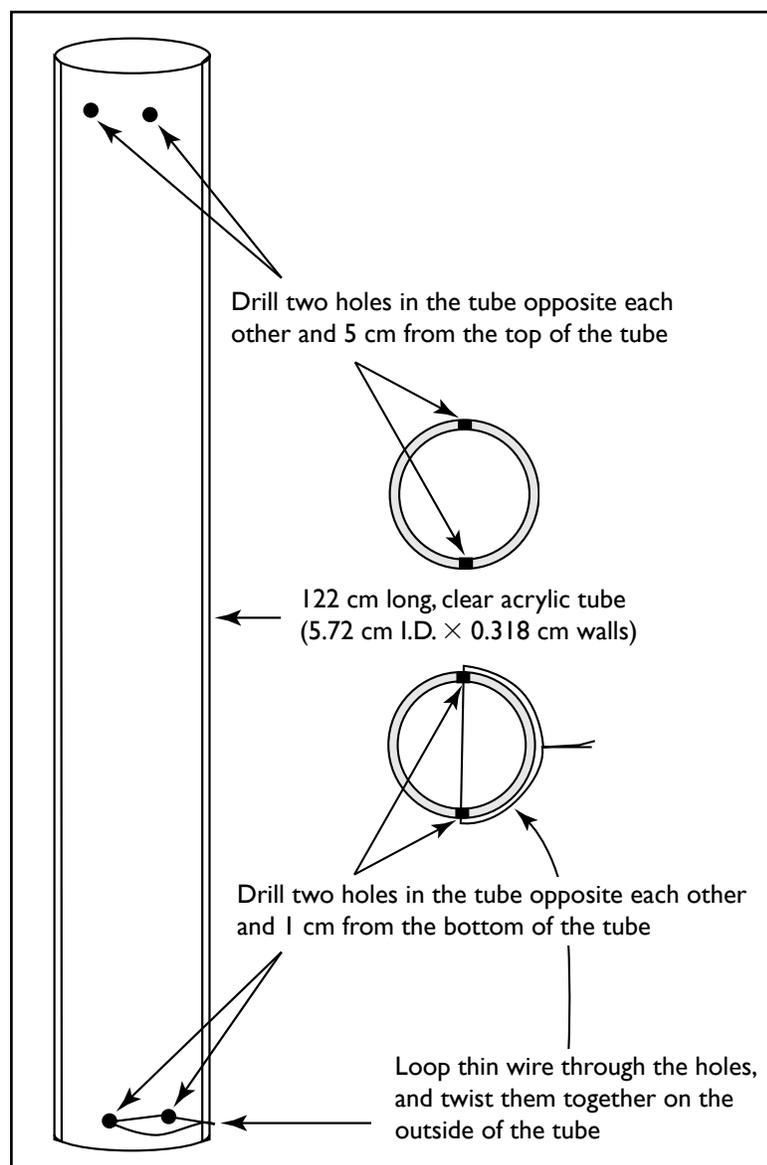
Drilling holes and inserting a wire loop into the larger acrylic tube.
